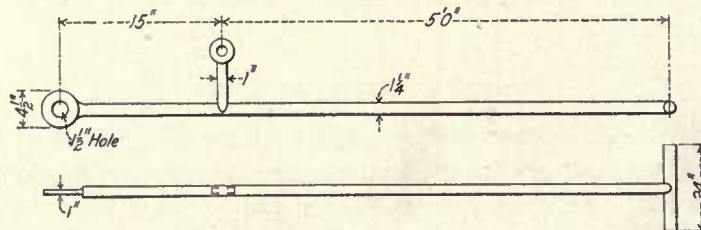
Device for Handling Cylinder Heads on Locomotives.
